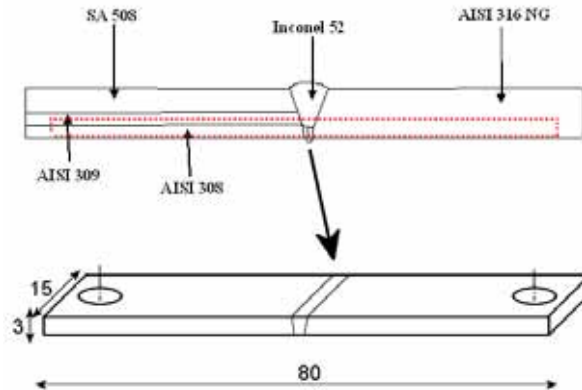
Schematic EAC specimen cutting location (transverse orientation) and specimen dimensions.
